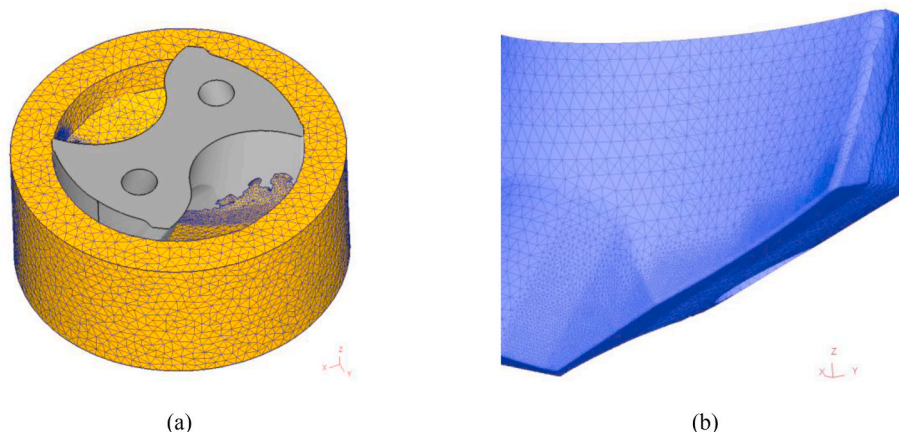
a) 3D FE model of drilling and b) detail of the mesh on the drill cutting edge.
